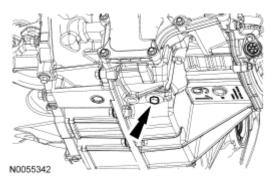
Identifying Engine Block Heater Harness, Radiator Support, A/C Suction Tube & Engine Wiring Harness
